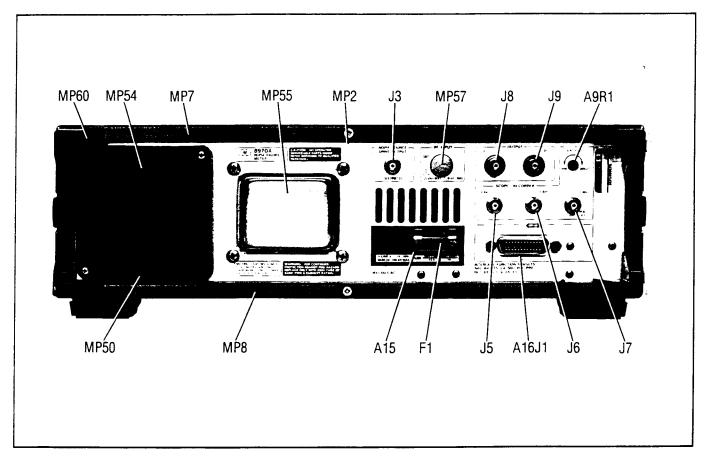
Chassis and Mechanical Parts Identification — Rear Panel
